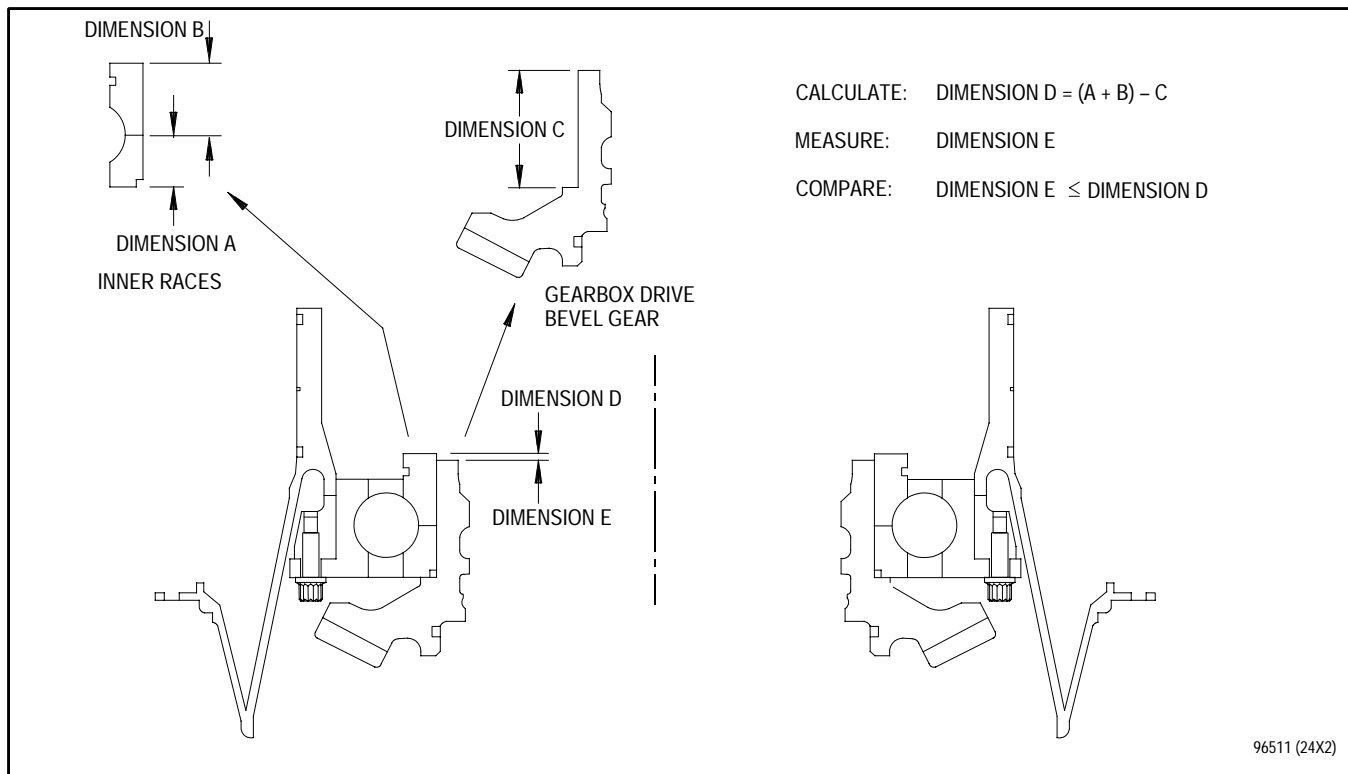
No. 3 Bearing Inner Races and Balls Installation on Gearbox Drive Bevel Gear - Seating Check
